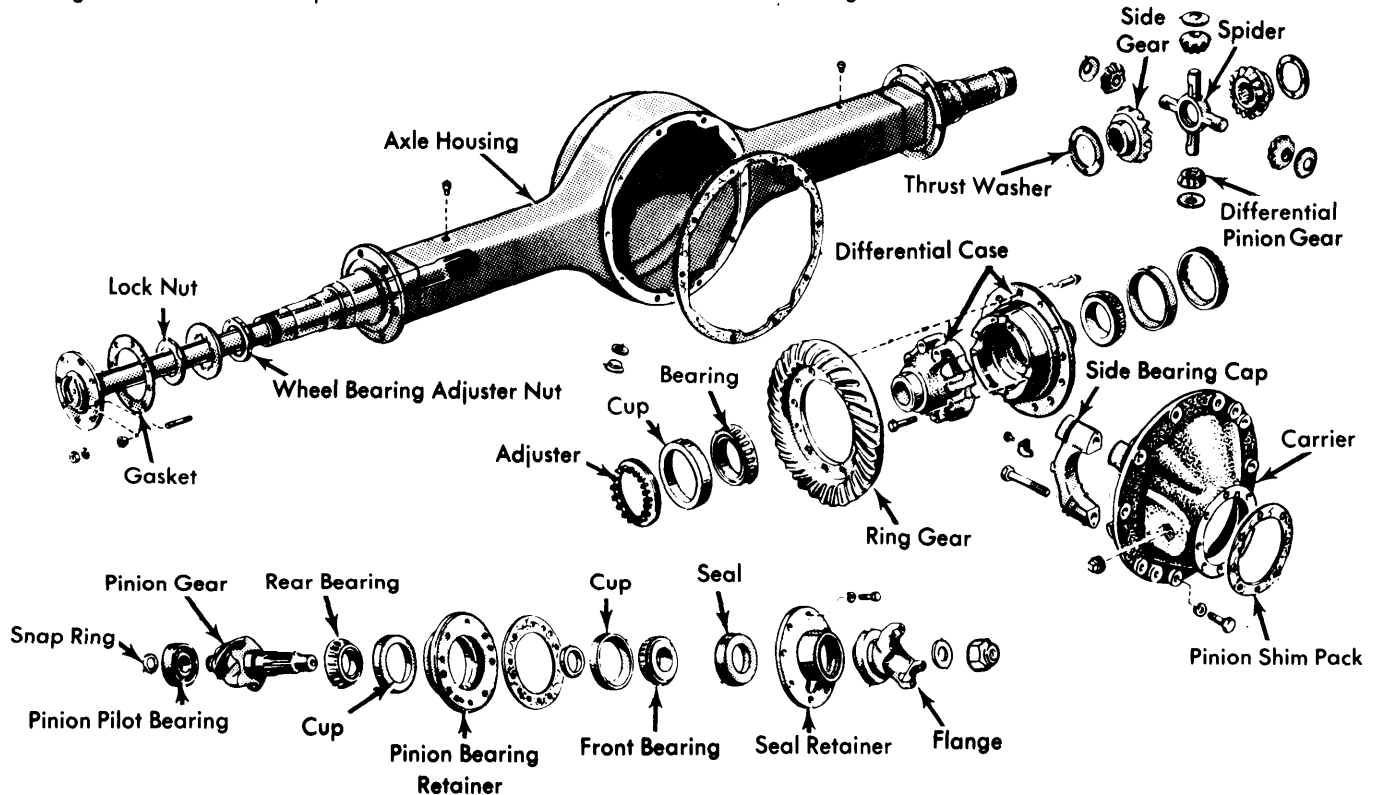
Exploded View of Rockwell Single Speed Axle Assembly
